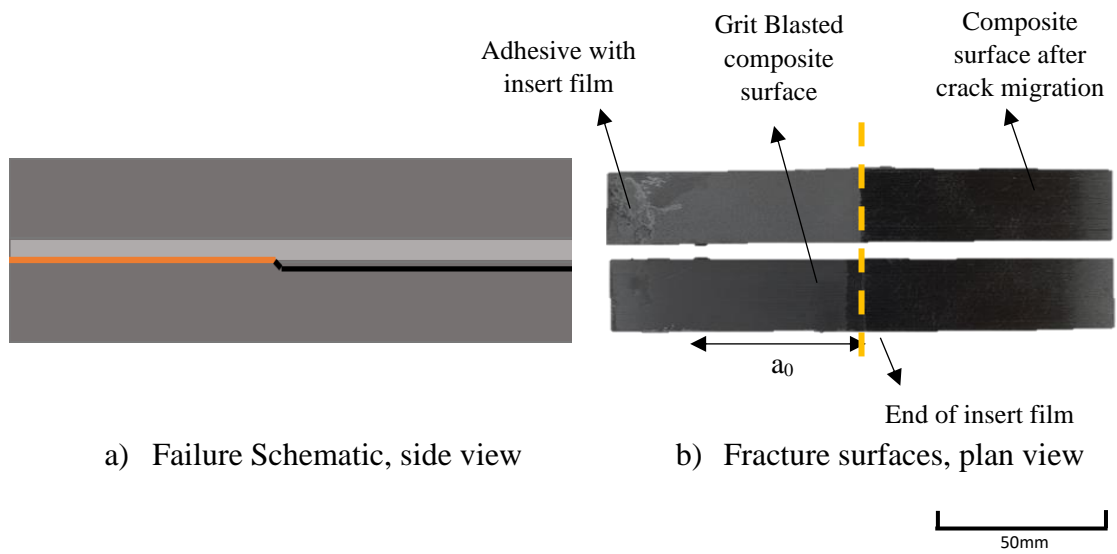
Failure schematic and fracture surfaces for the grit blasted 0.2mm DCB specimens.
